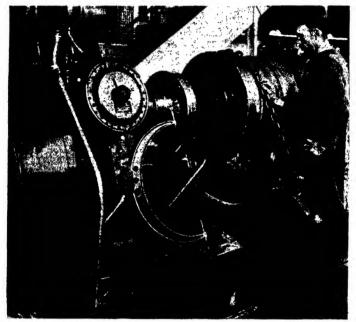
Head end of boring machine. Note collapsing cover for boring bar.
